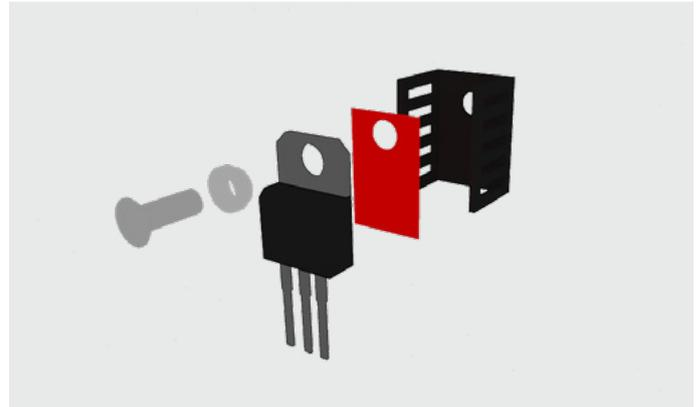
Transistor mounted on a heat sink with an Insulator pad
